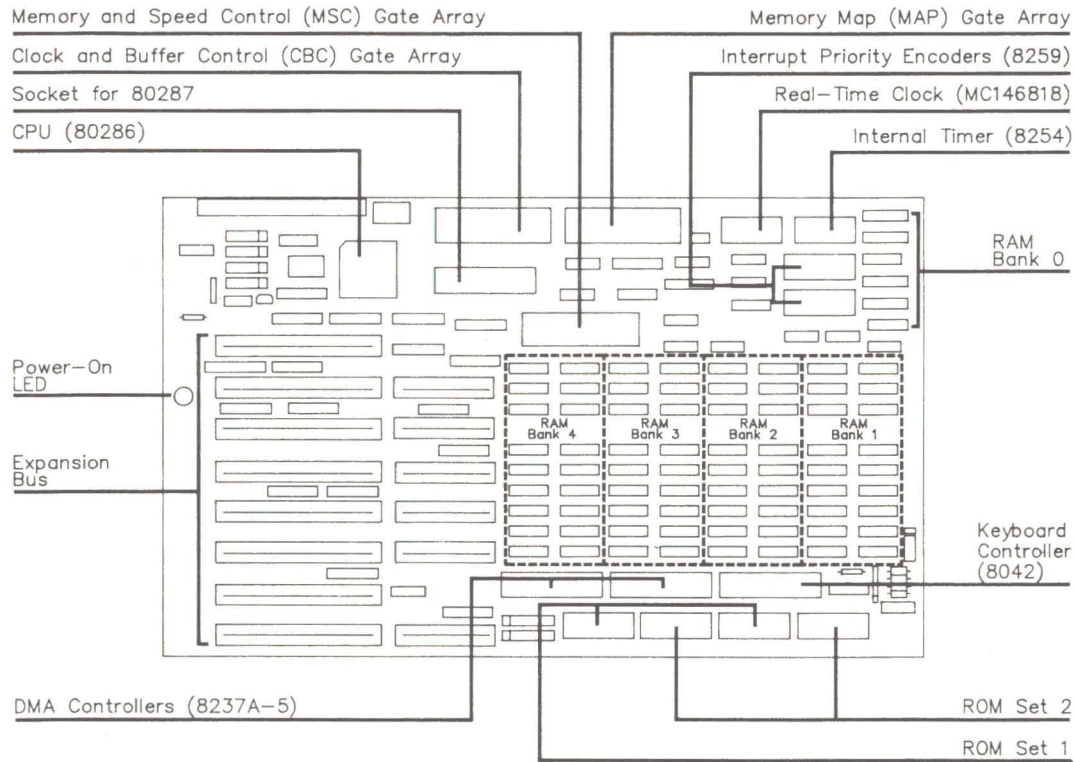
COMPAQ DESKPRO 286 Version 2 System Board Component Layout (Page 1 of 1)
